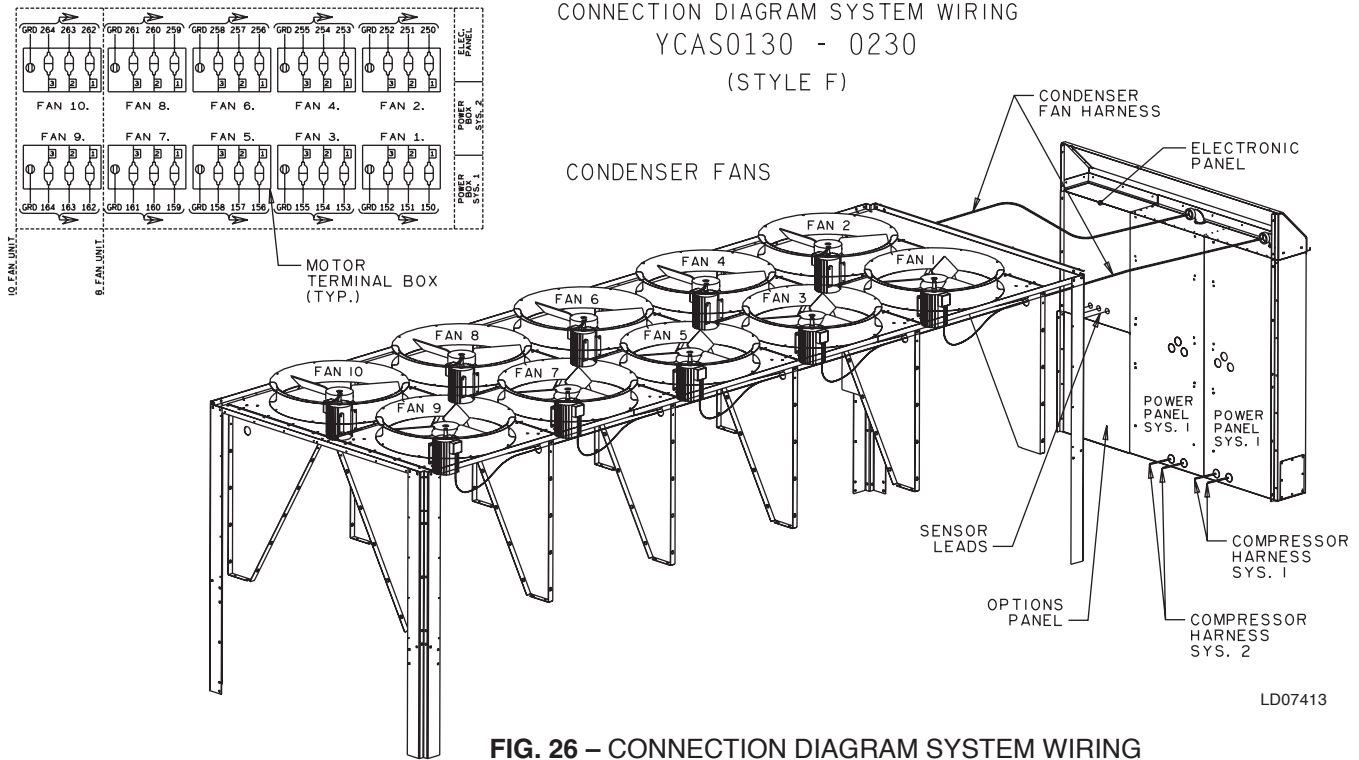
CONNECTION DIAGRAM SYSTEM WIRING
